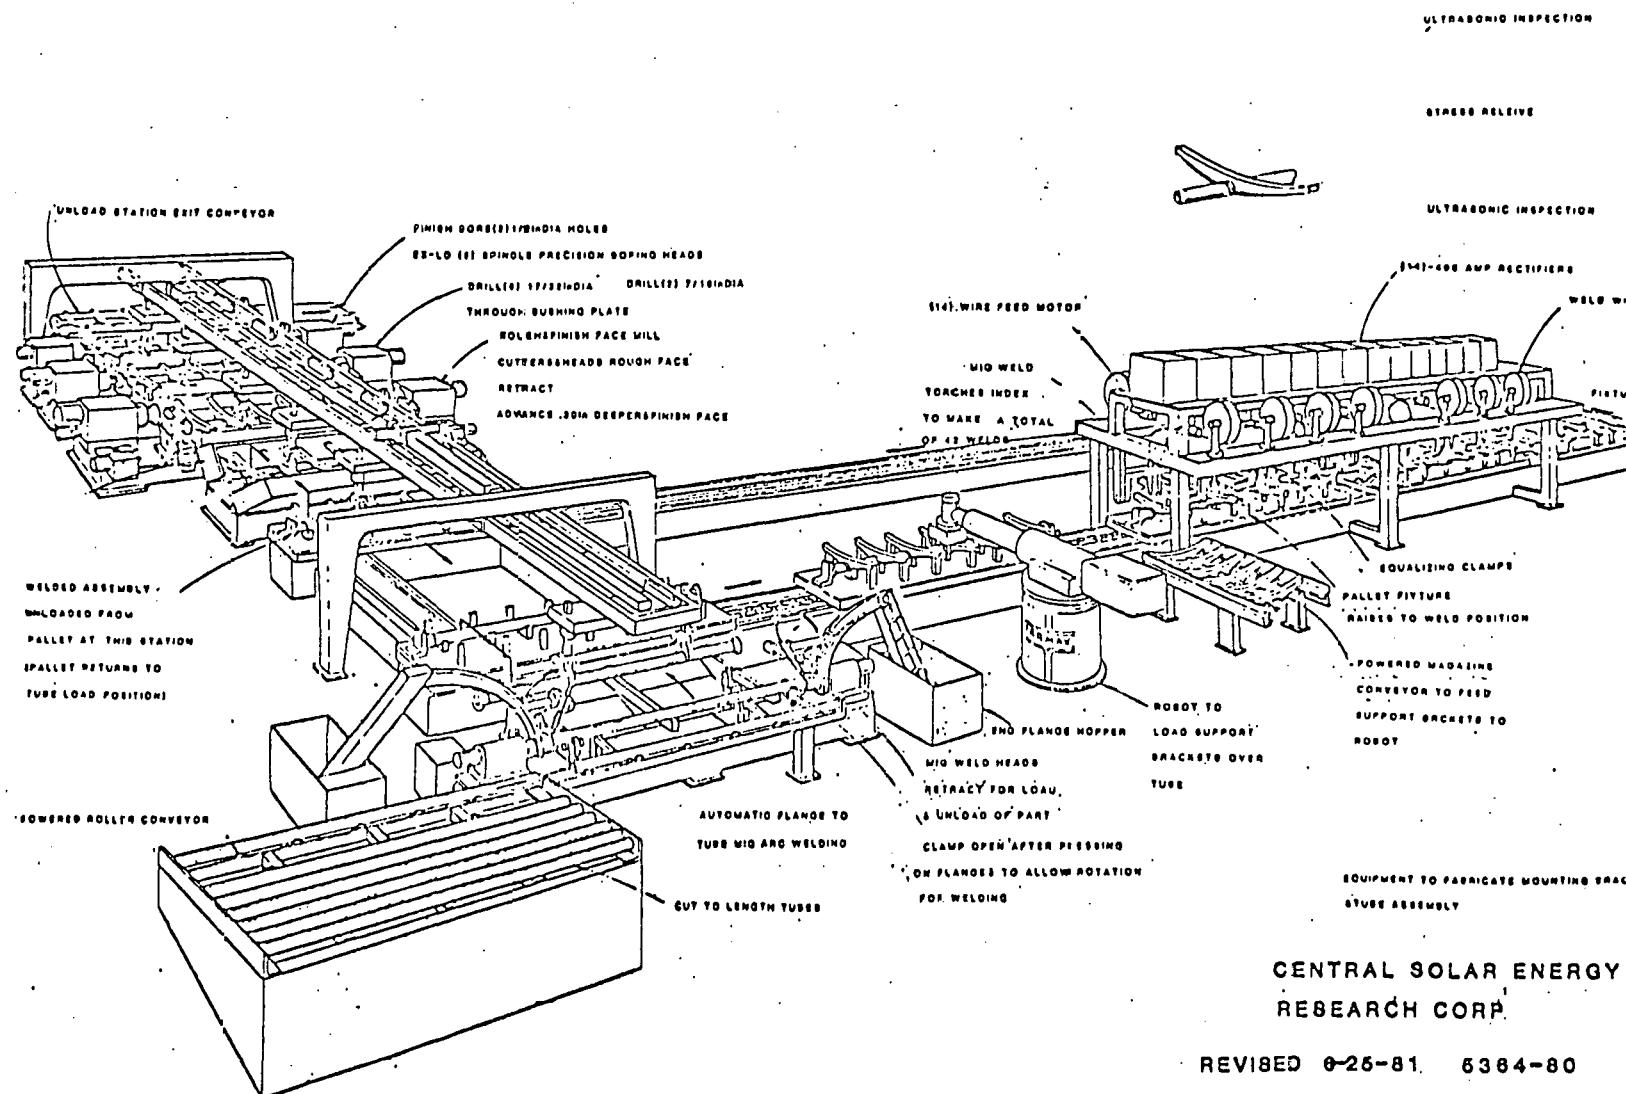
TORQUE TUBE ASSEMBLY
